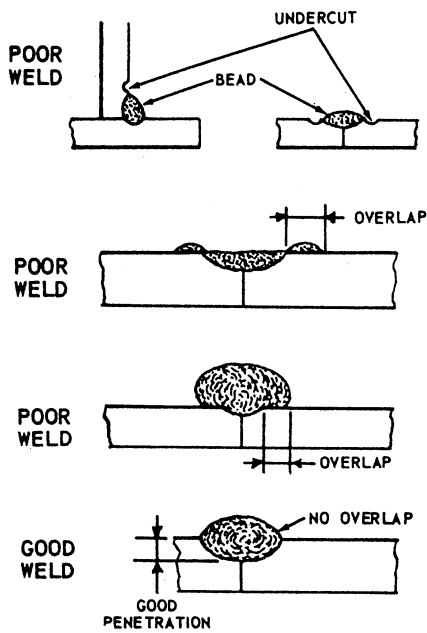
Undercuts and overlaps in welding.
